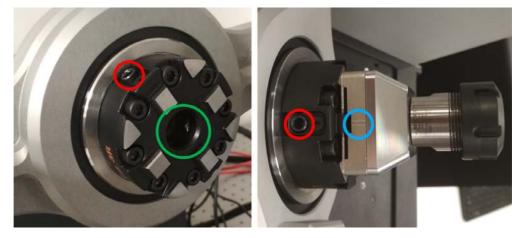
Five Axis rotator without any holder attached (left) and with a collet holder (right)
